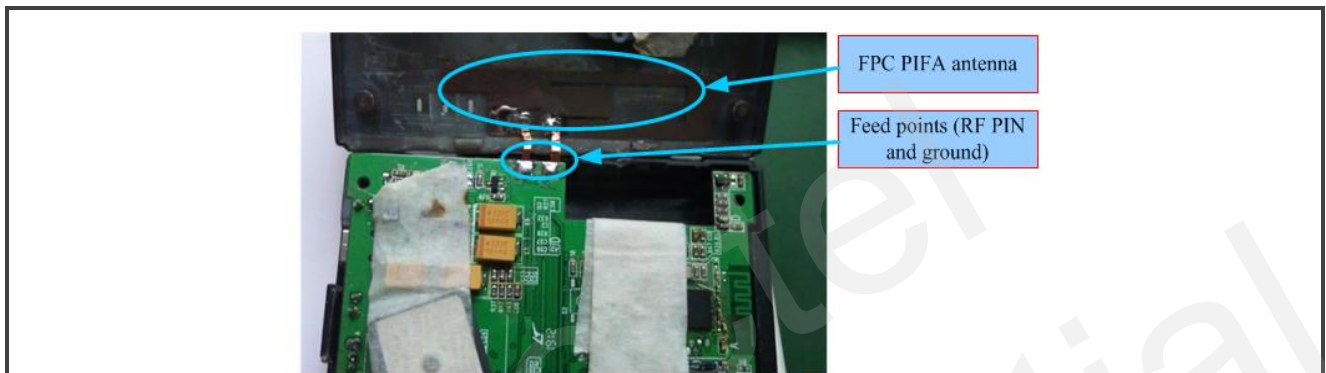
Example of FPC PIFA Antenna with Welding Pads and Feed Points
